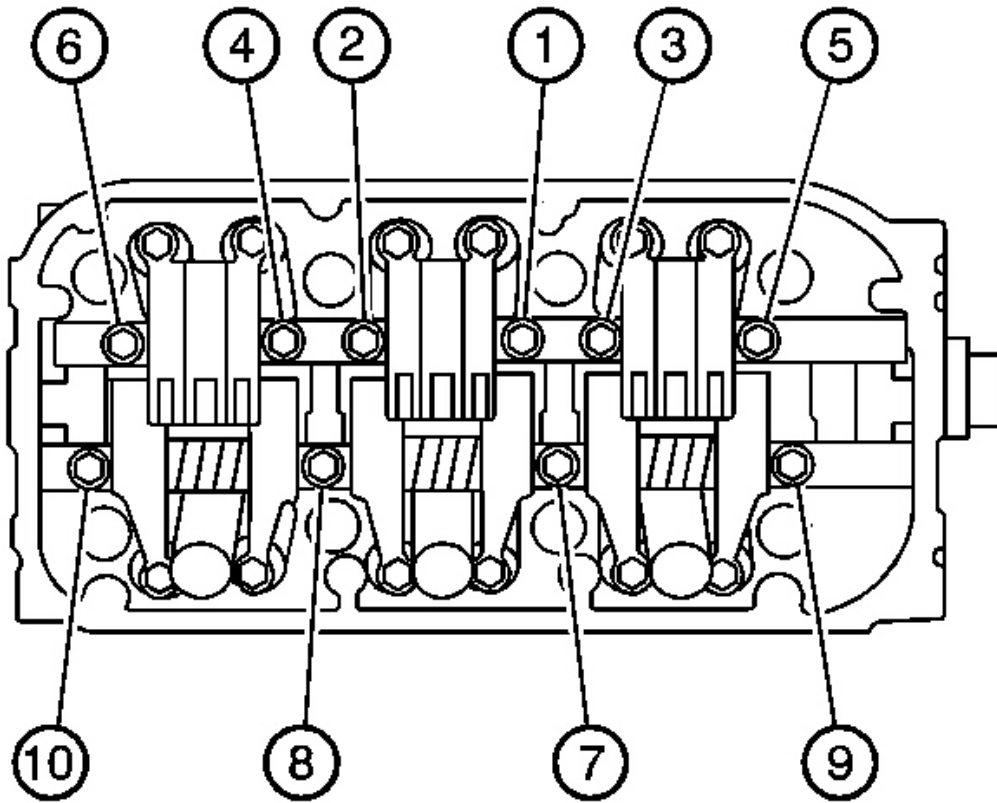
Identifying Right Side Rocker Shaft Retaining Bolts
